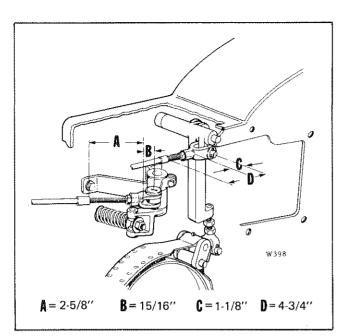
ADJUSTMENT OF BRAKE LINKAGE,
